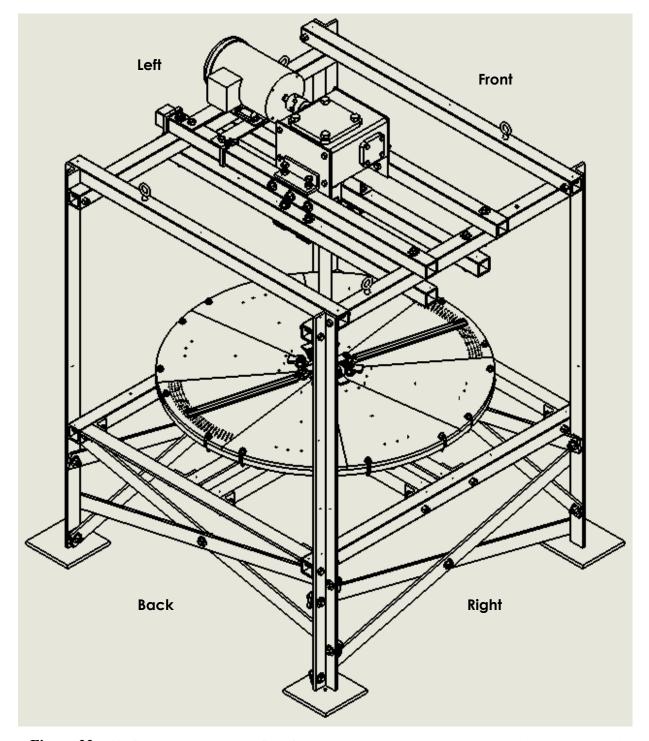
This figure shows what the final frame assembly, turntable assembly, and gear reducer and motor assembly should resemble
